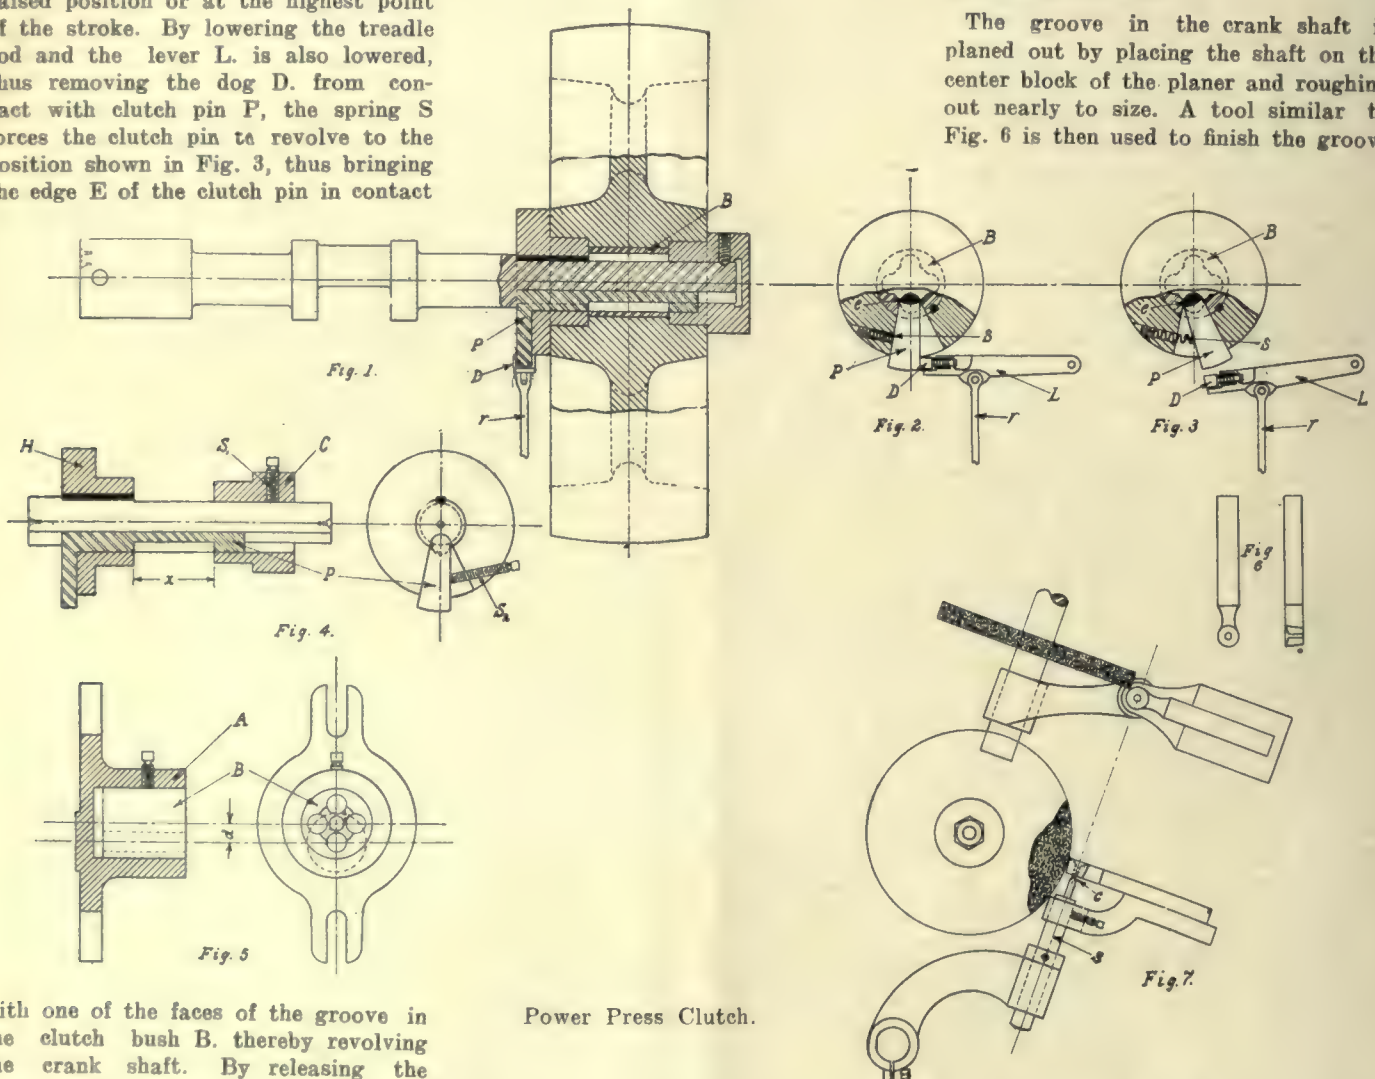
shows the clutch assembled on the crank shaft with the fly-wheel in position.
